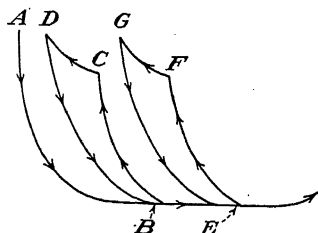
Direction of travel of the electrode in making a weaving bead on a horizontal butt weld.
